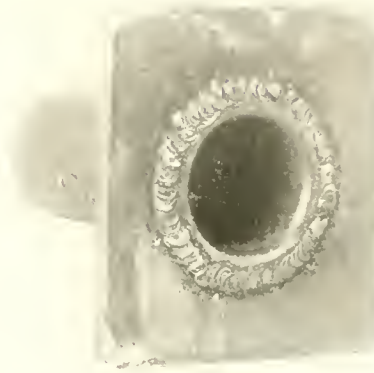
B. FLUE WELDING. 1. Put flue in if it were not to be welded. 2. Send the engine out for a few trips to let the tubes take their set. 3. Sand blast the flue sheet. 4. Weld flues. A heavy bead of welded metal around the flue is not desirable. Put on the smallest bead that can be thoroughly welded to both flue and sheet.
